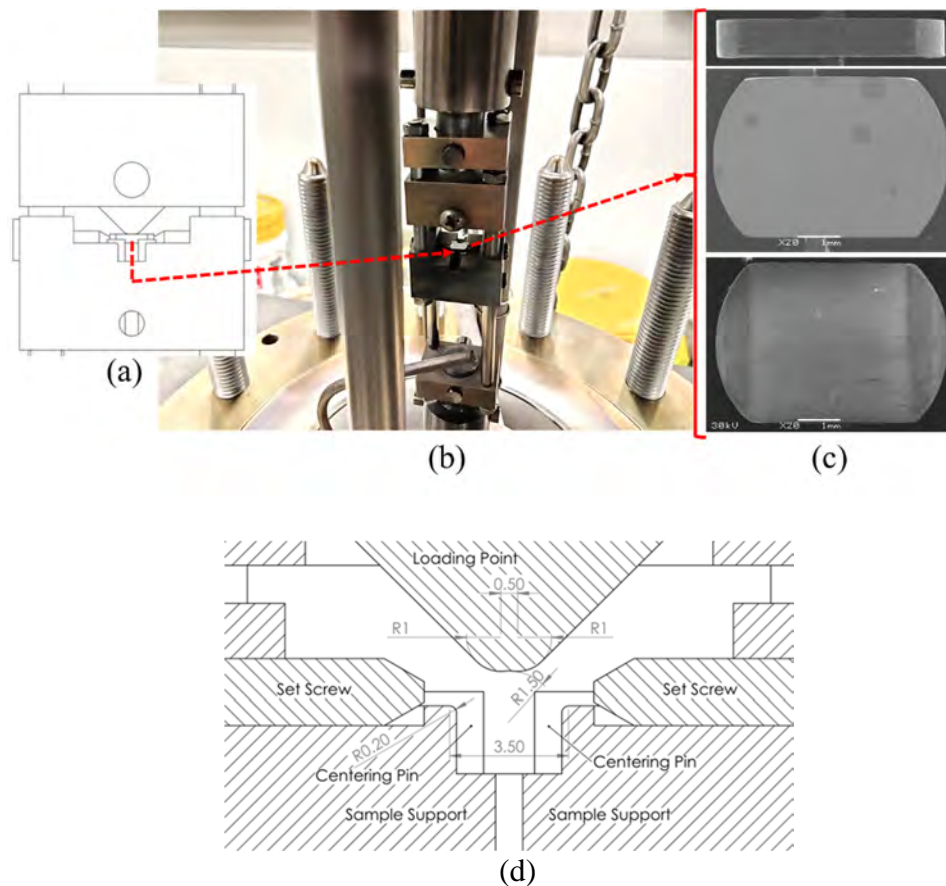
Schematic of the 4PB loading fixture, (a) a side view of a conceptual design the loading fixture, (b) The IM2 loading fixture and one of the tested samples, (c) SEM images of an example of side view, surface view without oxidation, and surface view with after 4PB testing, and (d) a side view of the loading fixture with dimensions.
